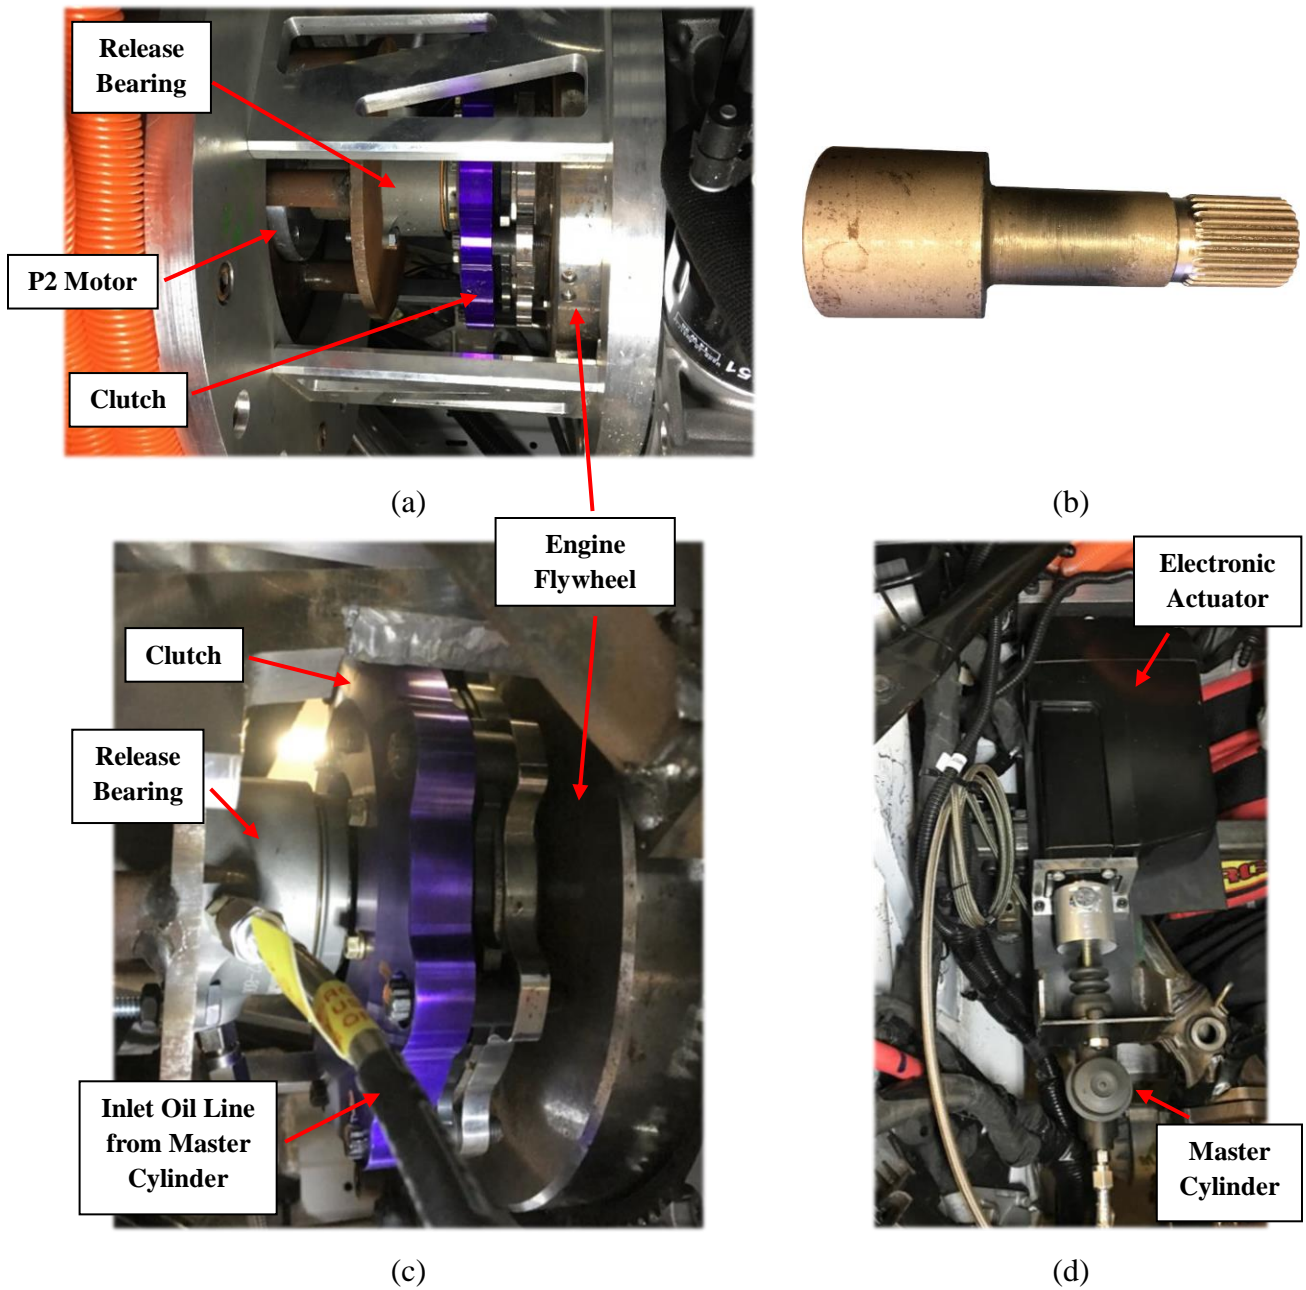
Clutch Integration – (a) clutch integration in bellhousing, (b) P2 motor to clutch shaft, (c) clutch integration close up, (d) electrical actuator and master cylinder
